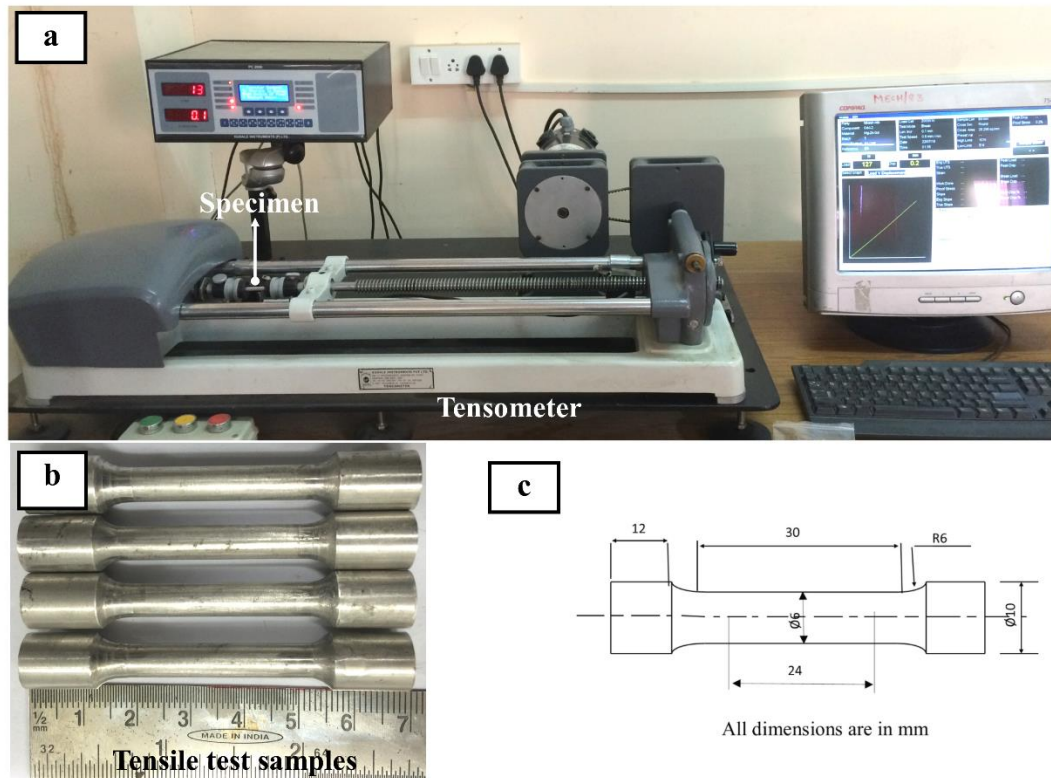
Tensile testing (a) Electronic tensometer (b) Tensile specimens (c) Schematic of specimen
